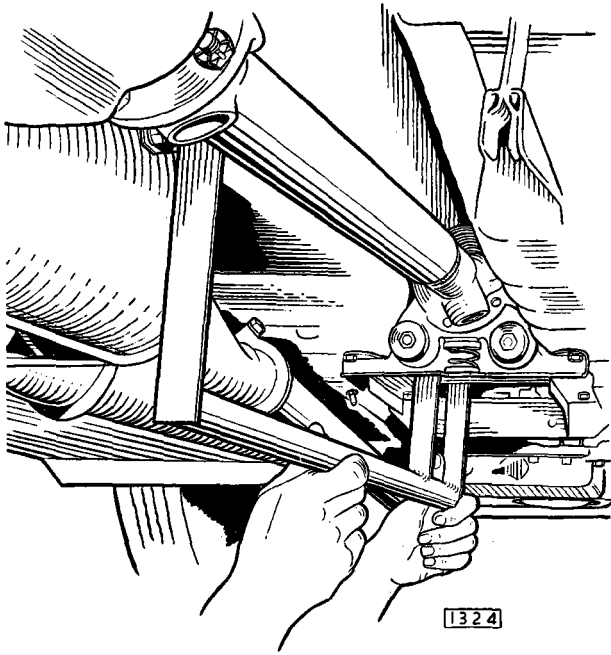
Checking the alignment of the front and rear propeller shafts.
